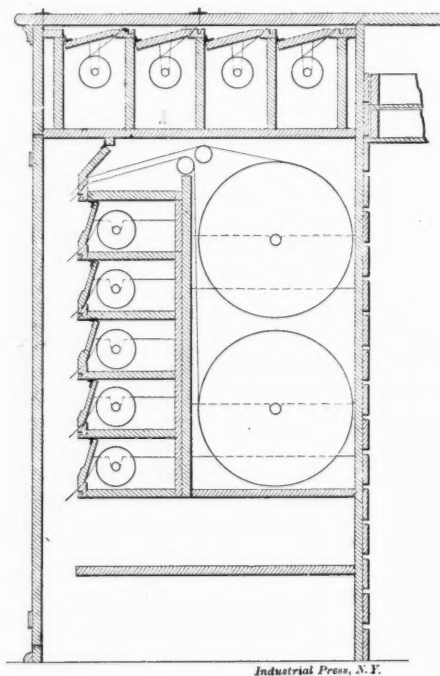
Sectional View of Cabinet for Storing Blueprint and Drawing Papers.
